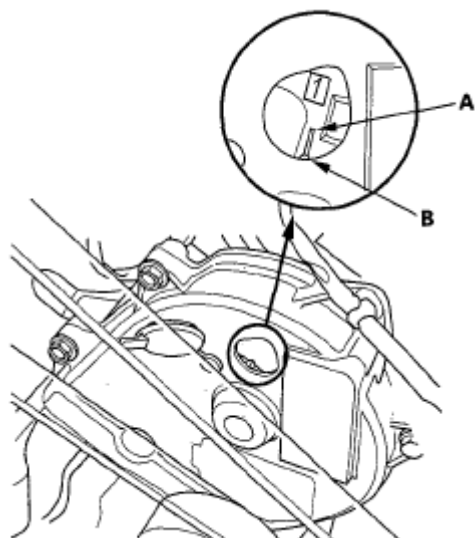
Identifying No. 1 Piston Top Dead Center (TDC) Mark
